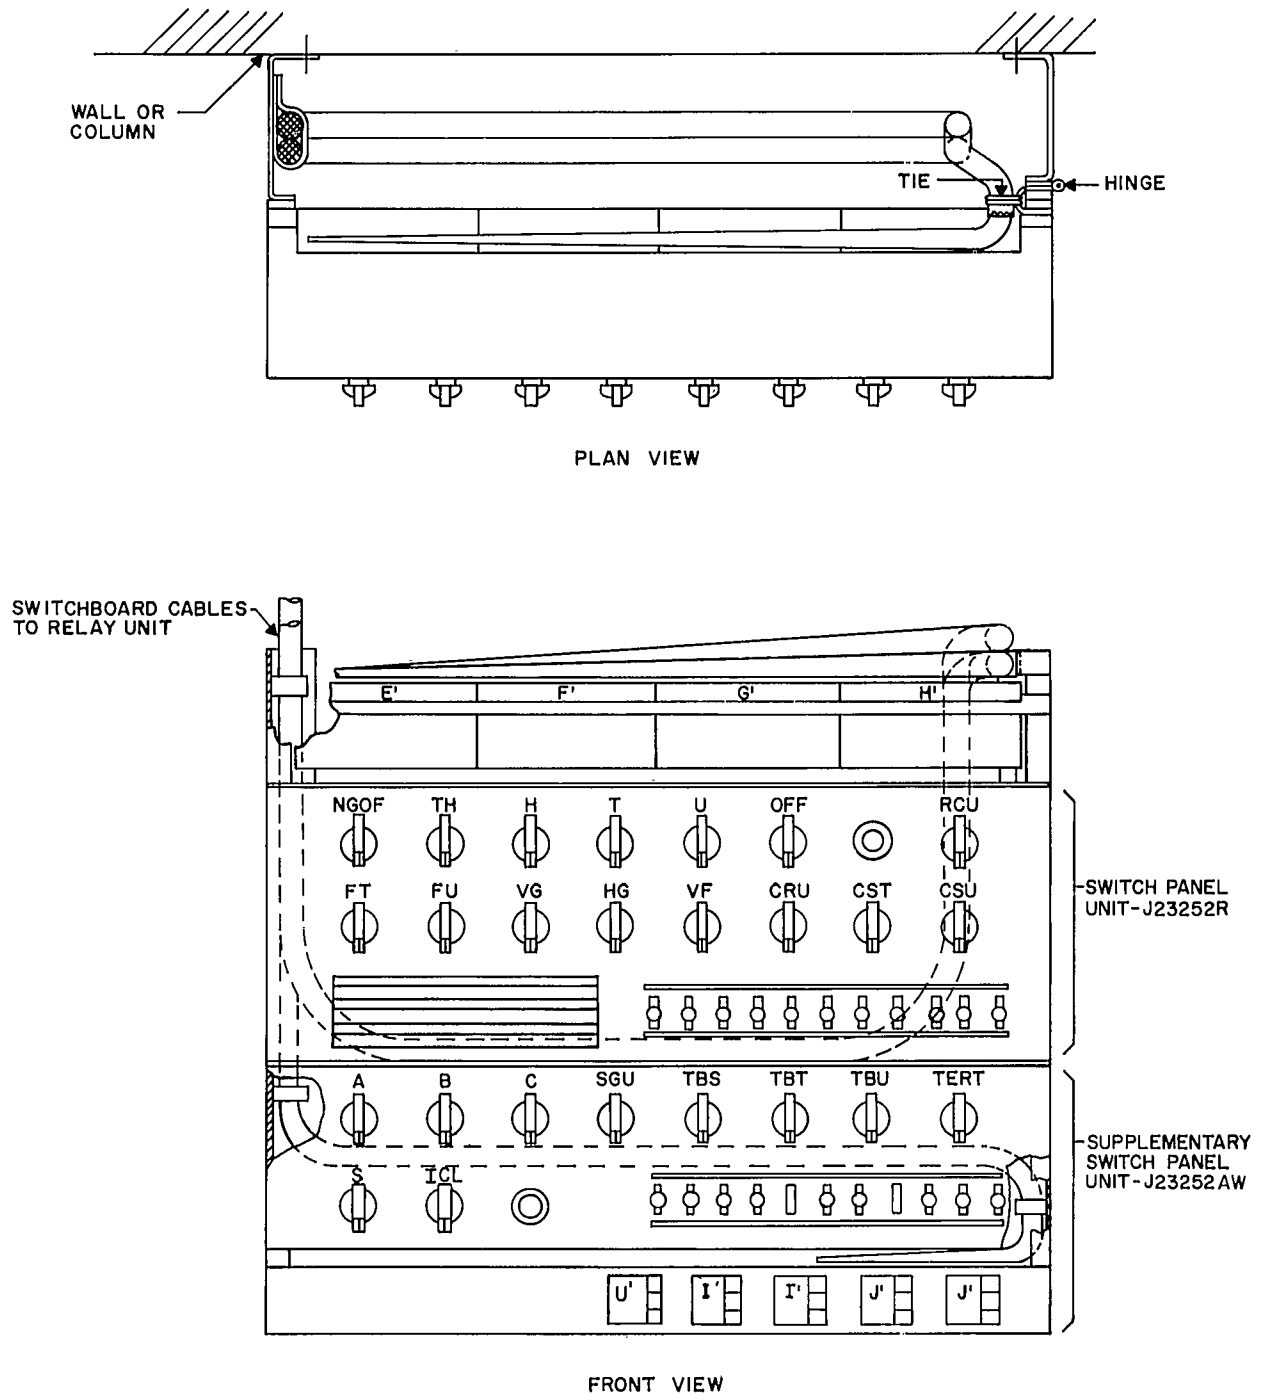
Switch Panel Unit Mounted on Wall or Column (A&M Only)
